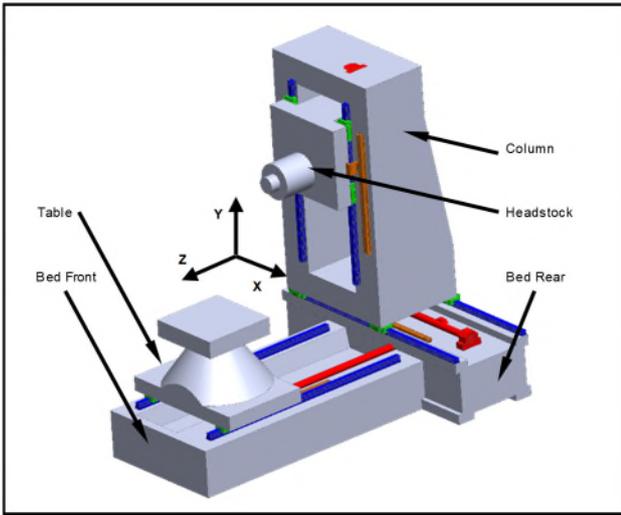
Demonstrator machine tool and areas of possible IDS placement
